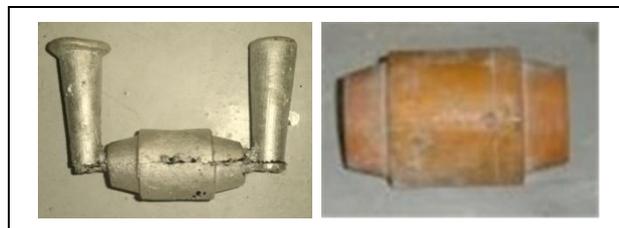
(left) The produced casting part, with its gating system (riser, sprue, runners) (right) The wooden pattern assembly.
